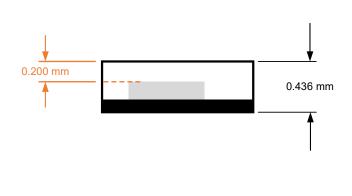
XtremeSense TMR Sensor Location for CT8152 products in 5-lead SOT23 Package
